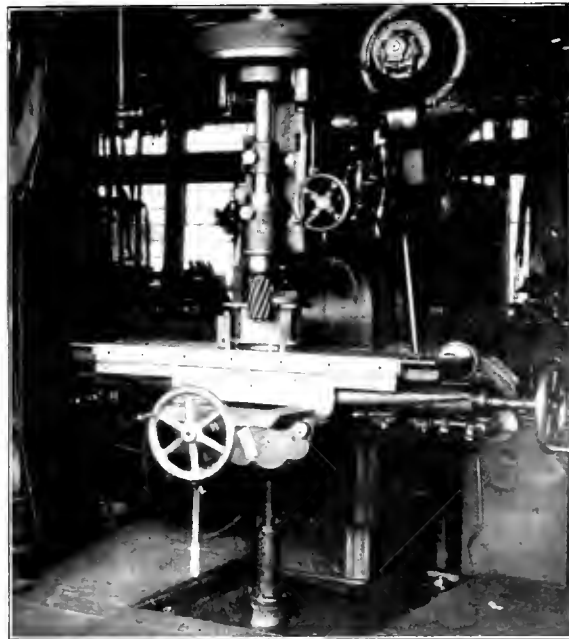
Milling the Recess in the Flange of the Main Rod Brasses
